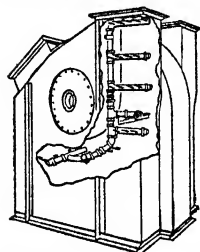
Spray arrangement for Hydro-volute scrubber.
